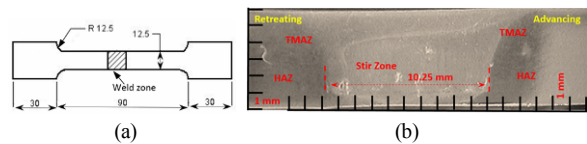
Cutting out specimens from a FS-welded AA6061-T651 joint: (a) dimensions of flat tensile specimen; (b) macrostructure of the FSW joint with a rotational speed of 650 rpm and traverse speed of 0.78 mm/s.
